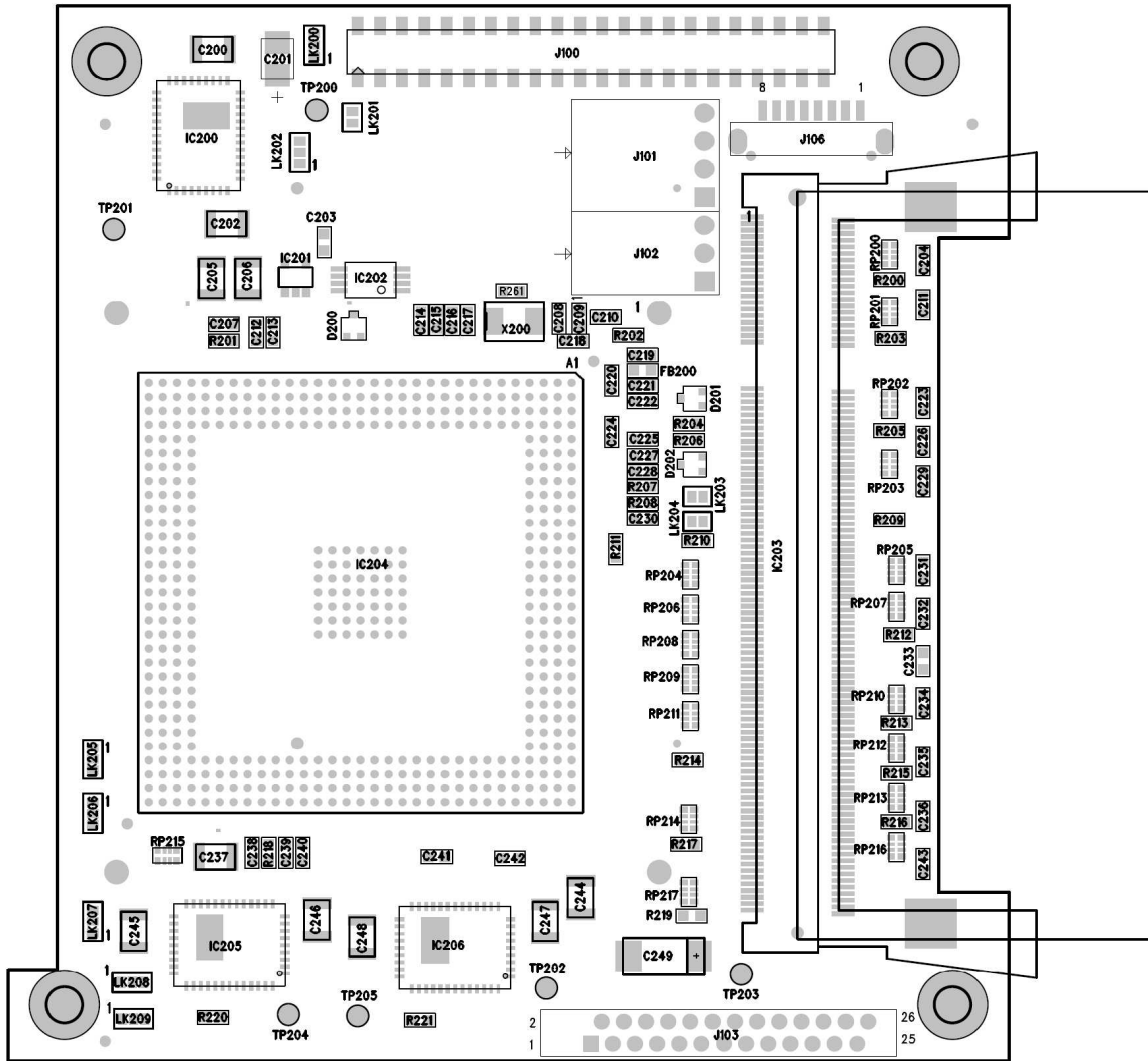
TOP BOARD, TOP SIDE COMPONENT PLACEMENT
